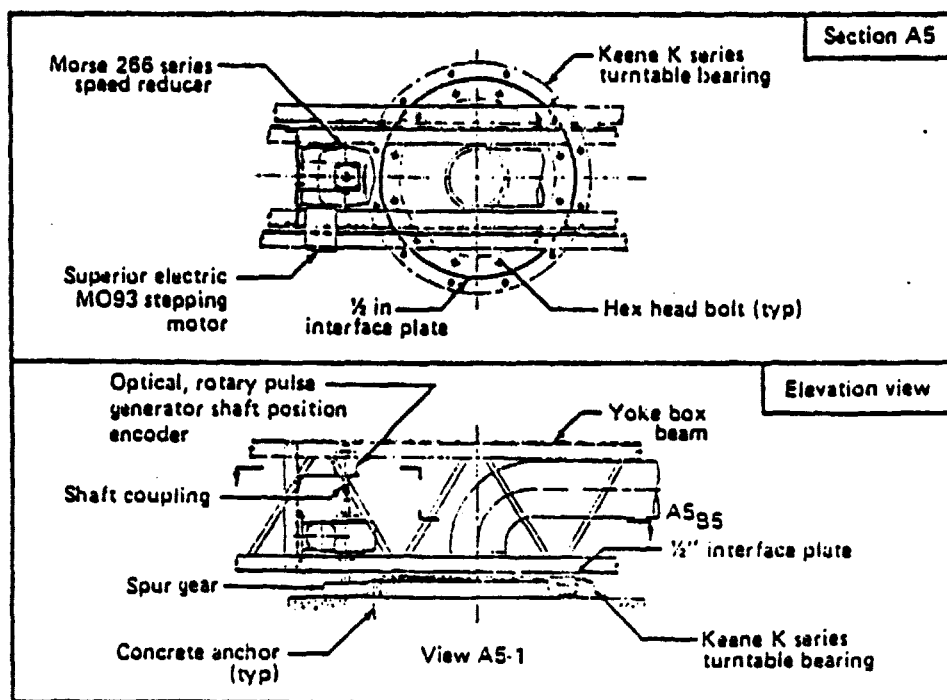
Yoke Bearing & Azimuth Drive
